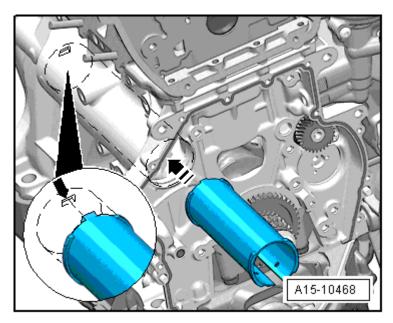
Identifying Pipe For Balance Shaft - Installation Position
